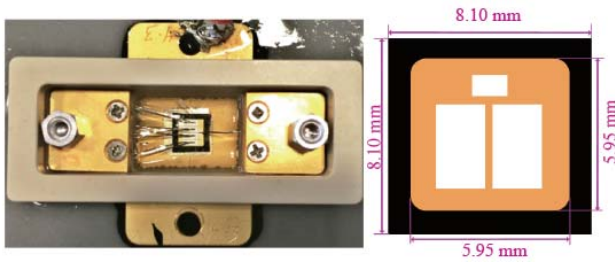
15 kV SiC MOSFET, Packaged Module & Die Dimension [10]
